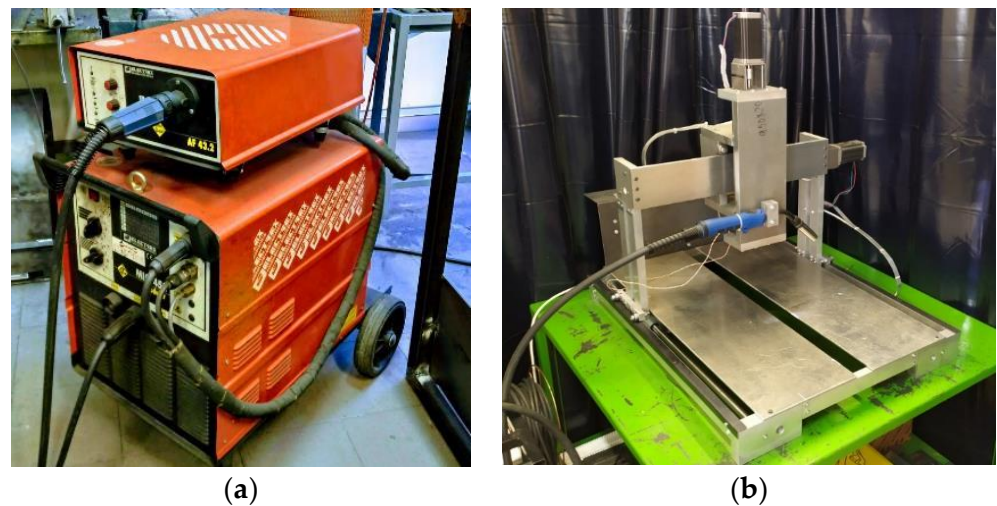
(a) MIG 453 modular welding machine; (b) CNC equipment with welding torch adaptation.
